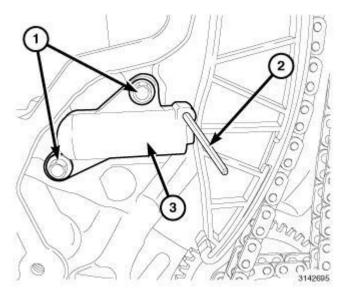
Pin, Right Timing Chain Tensioner & Bolts Courtesy of CHRYSLER GROUP, LLC
